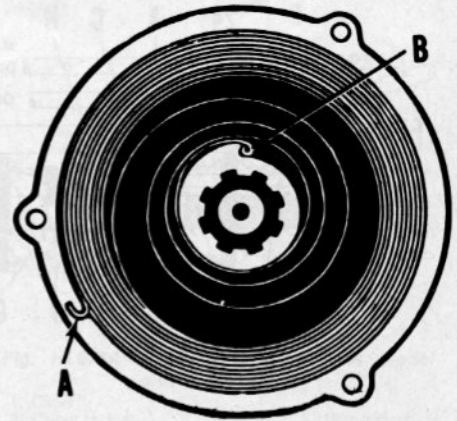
View of rewind spring installation in starter cover. Hook outer loop (A) of spring in notch as shown. Inner loop (B) of spring must be curved inward to engage notch of spring lock.
